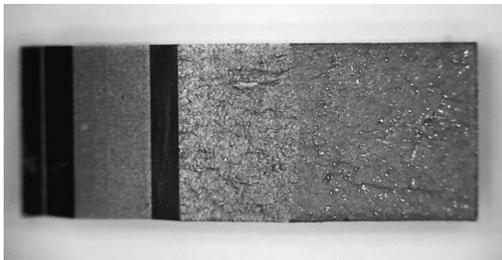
LONGITUDINAL CT TEST PIECE (KL3), STRESS RELIEVED
